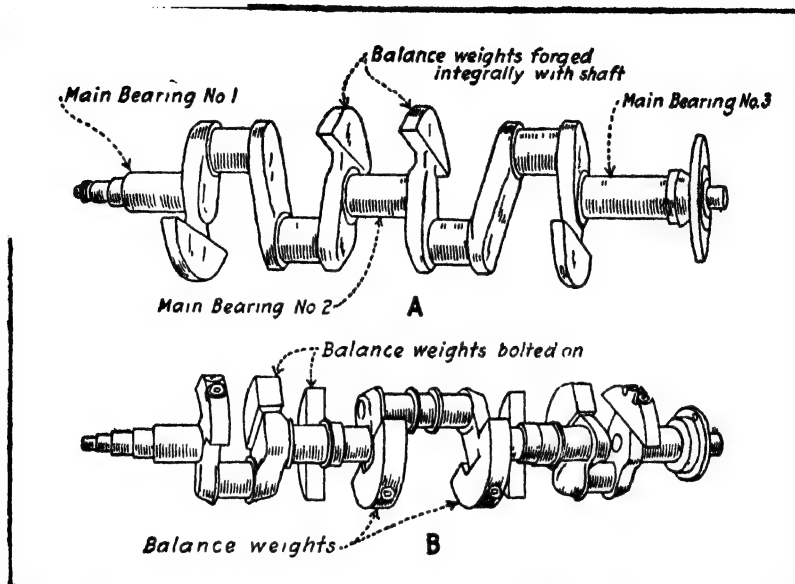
Use of Balance Weights in Automotive Engines to Counterbalance Crankshafts Reduces Engine Vibration and Permits High Rotative Speeds.
